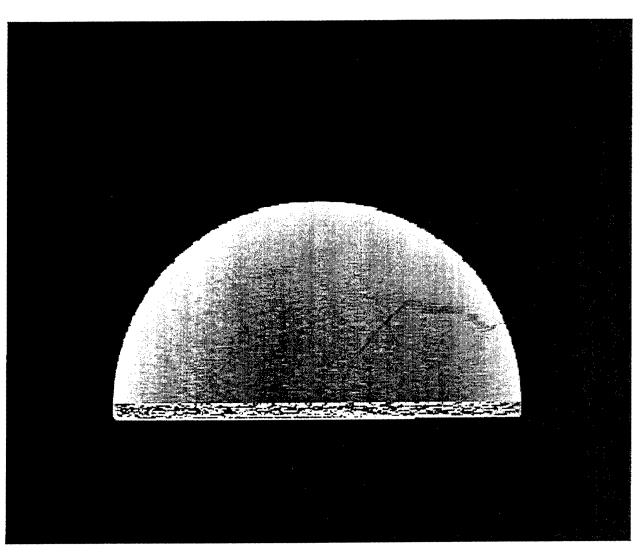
6.26 mm from bottom of disk with 65° rotation about X-axis.
